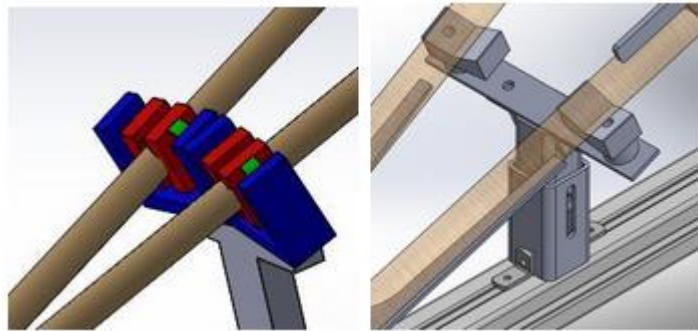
a) Self-Centering Clamps b) Single V-Block Fixtures
